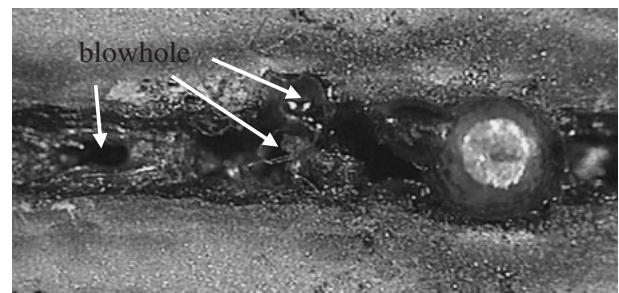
Bead Surfaces for autogenous laser welding of zinc-coated and non-coated steel sheets.
